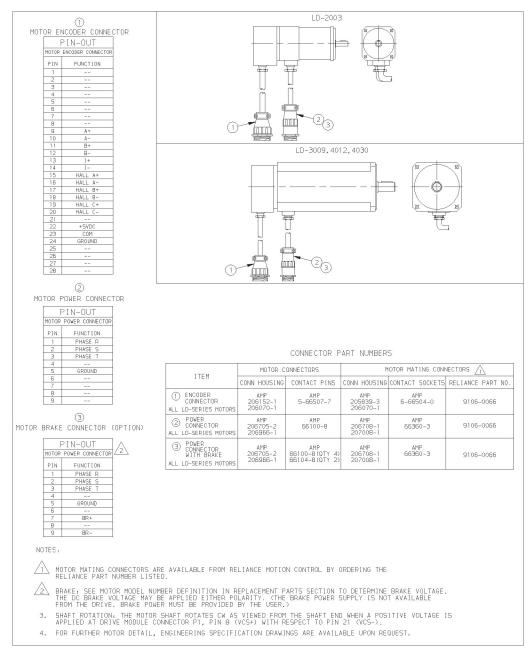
Outline and Mounting, LD-Series Motors
